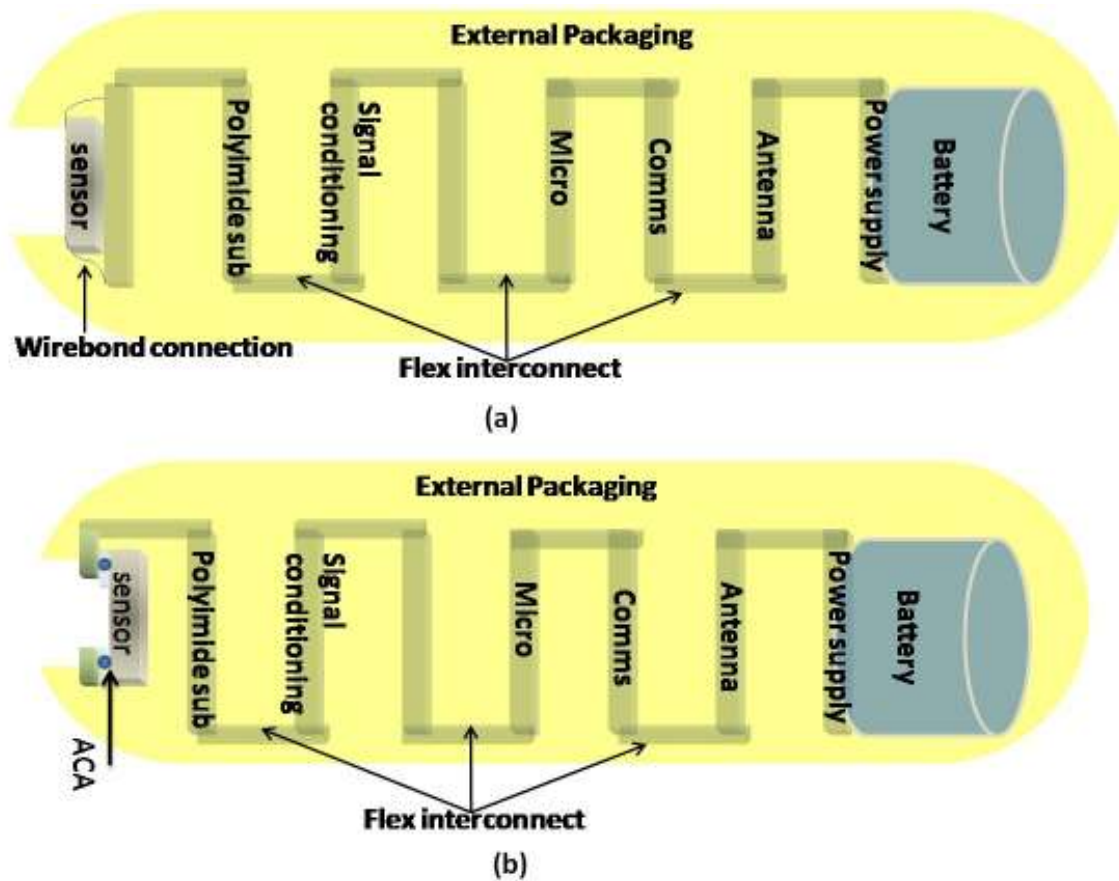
Schematic of packaging solution III (a) wire bonded and (b) Flip chip version.
